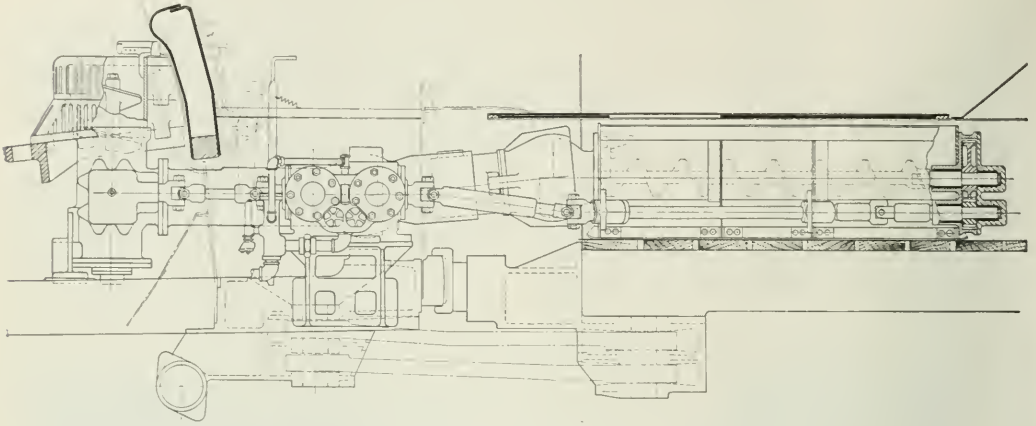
Side Elevation Drawing Showing Arrangement of Parts on the Locomotive
